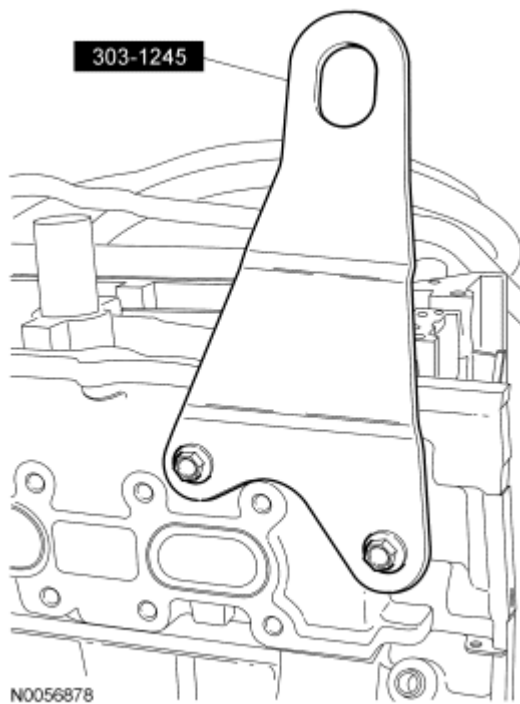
Installing Special Tool (303-1245) On LH Cylinder Head
